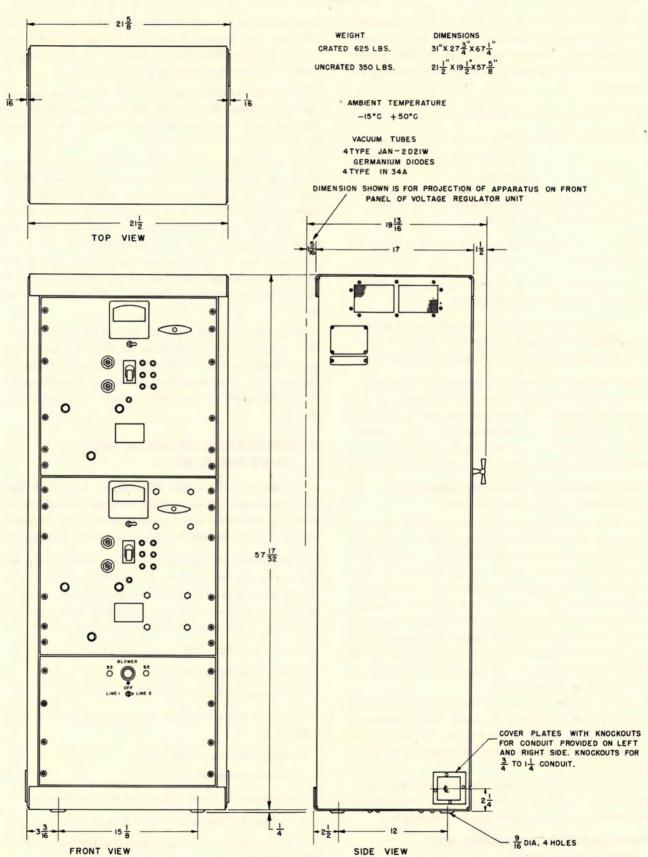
Outline, Voltage Regulator Assembly Type CN-239/FPN
